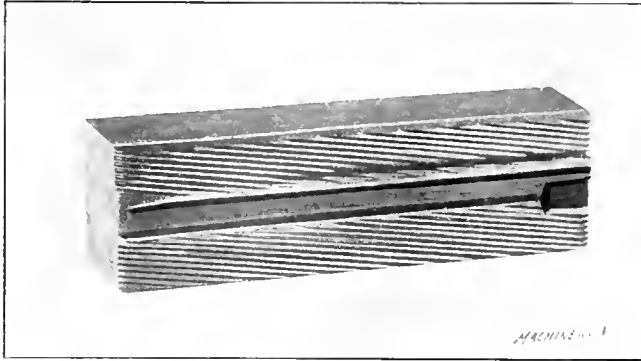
A Reversible Thread Rolling Die for Wood-screws
